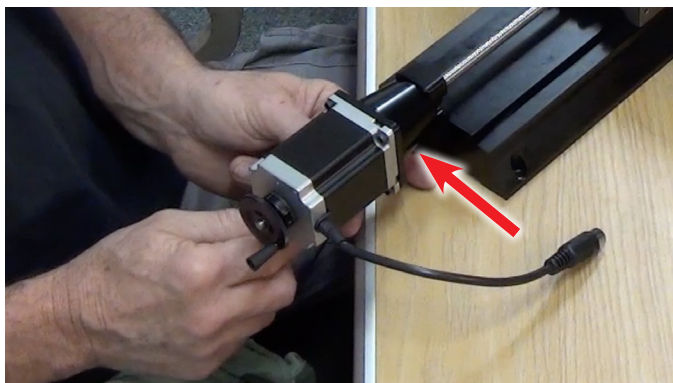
The red arrow is pointing to the three mounting holes at the base of the stepper motor mount adapter.
